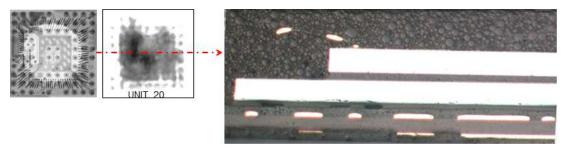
MSL3 passed on assembly package performed using softer and thicker DAF for Die2
